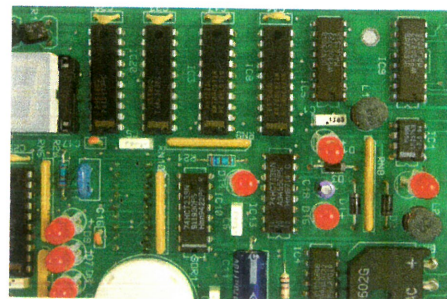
A multilayer printed circuit board with LED's, Microprocessors and various other components and traces mounted on both sides of the board.
